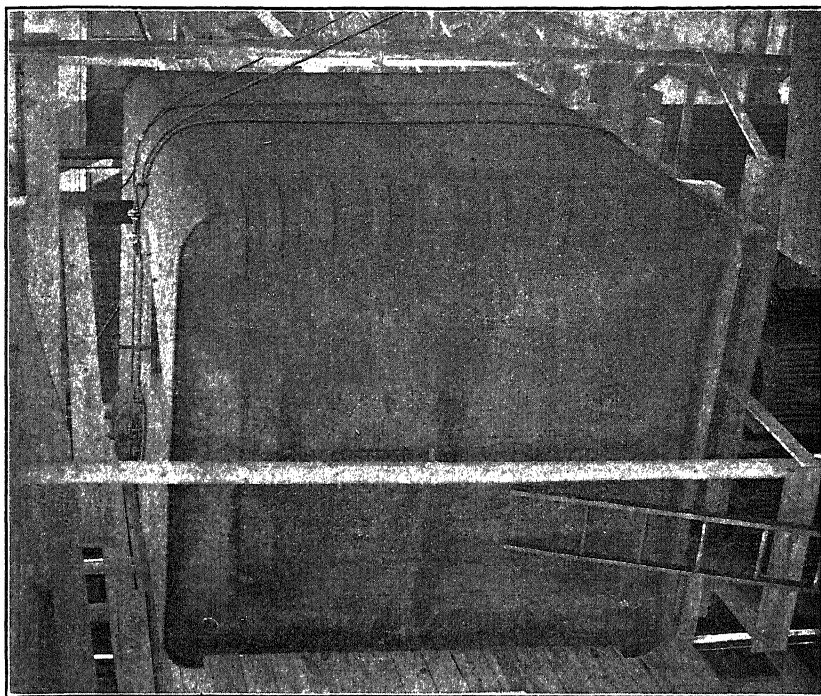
ELECTRIC-ARC WELDED BOX, UNDER 22-IN. VACUUM, SHOWING TOP SIDE DEPRESSED.
